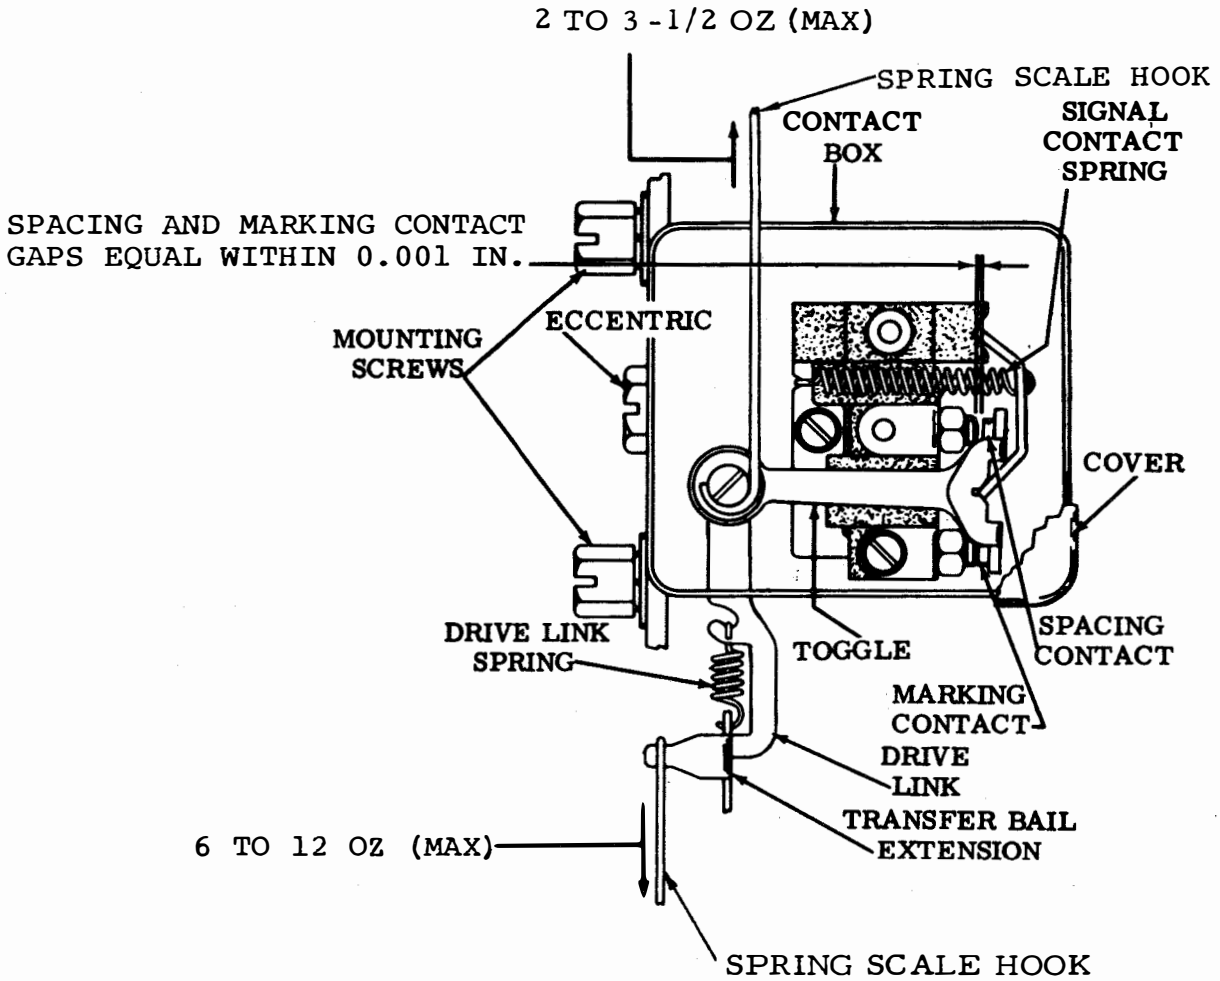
Signal Contact Clearance, Drive Link Spring, and Signal Contact Spring, Right Side Top View
